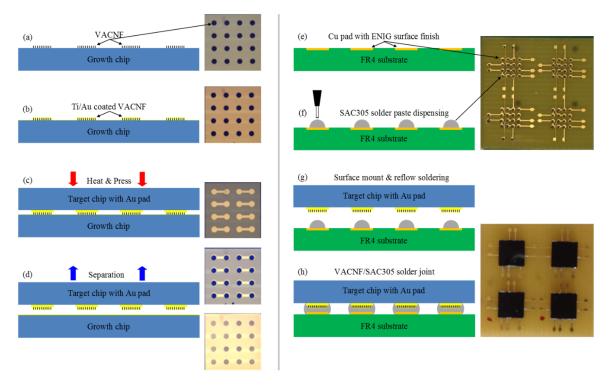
Assembly process of VACNF/SAC305 solder joint: (a) growing VACNFs with the PECVD method, (b) Ti/Au coating on the surface of each carbon nanofiber, (c) hot-pressing target chip on growth chip with flip-chip machine, (d) cold-separating target chip from growth chip, (e) FR4 substrate with Cu pad and ENIG surface finish, (f) dispensing SAC305 solder paste on the Cu pad with dispensing machine, (g) mounting target chip on FR4 substrate and running reflow process, (h) thermal cycling test sample with VACNF/SAC305 solder joints.
